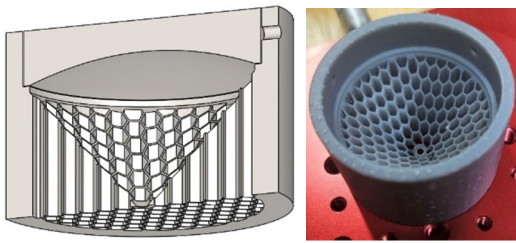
Proposed masking aperture 3-D drawing and photograph.
